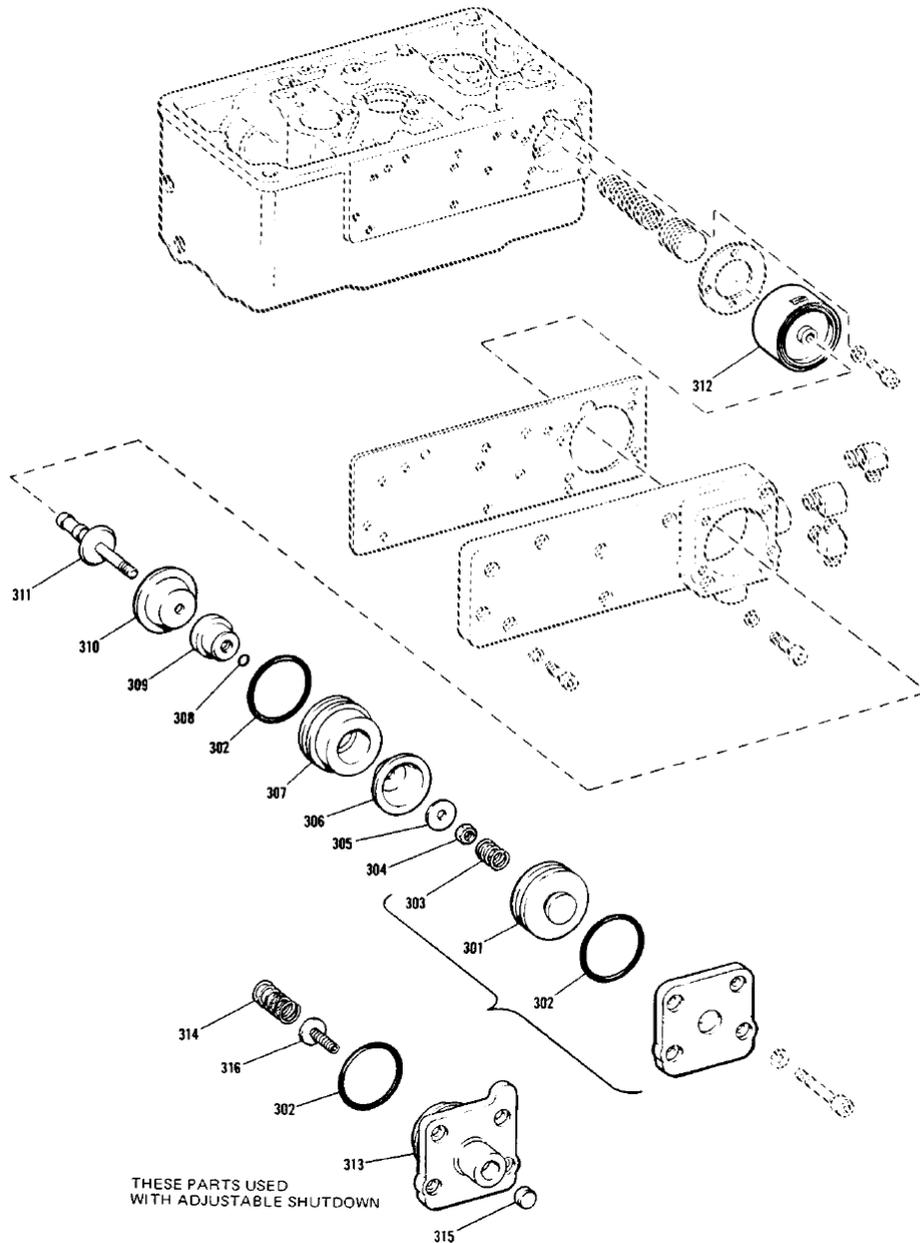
Differential Piston Lube Oil Pressure Failure Shutdown Parts
